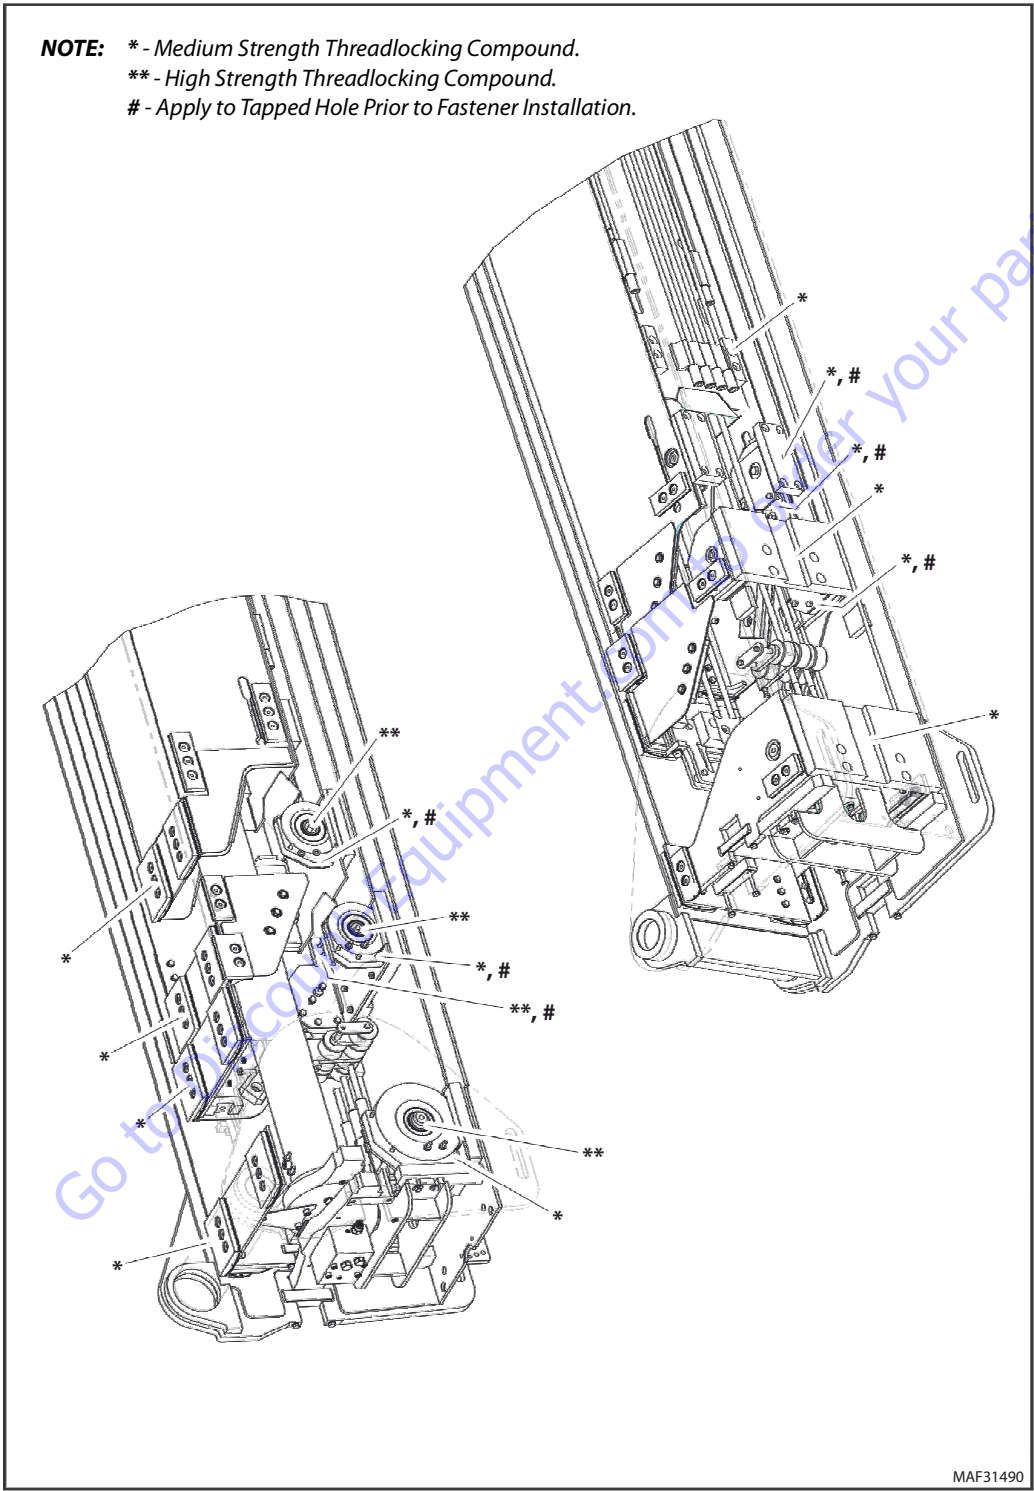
Locations for Threadlocker Application - Sheet 1 of 5
